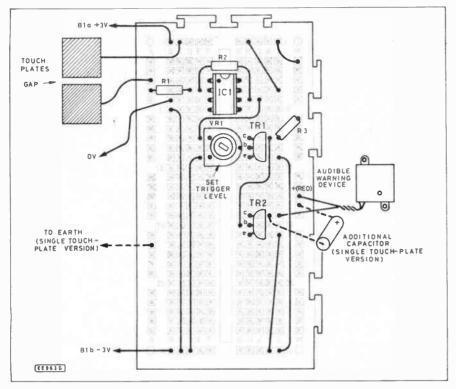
Demonstration breadboard component layout for the Simple Touch Switch.
